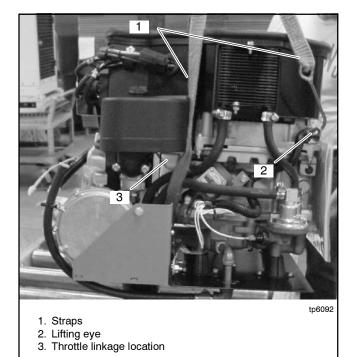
Lifting the Generator Set, Air Cleaner Side
